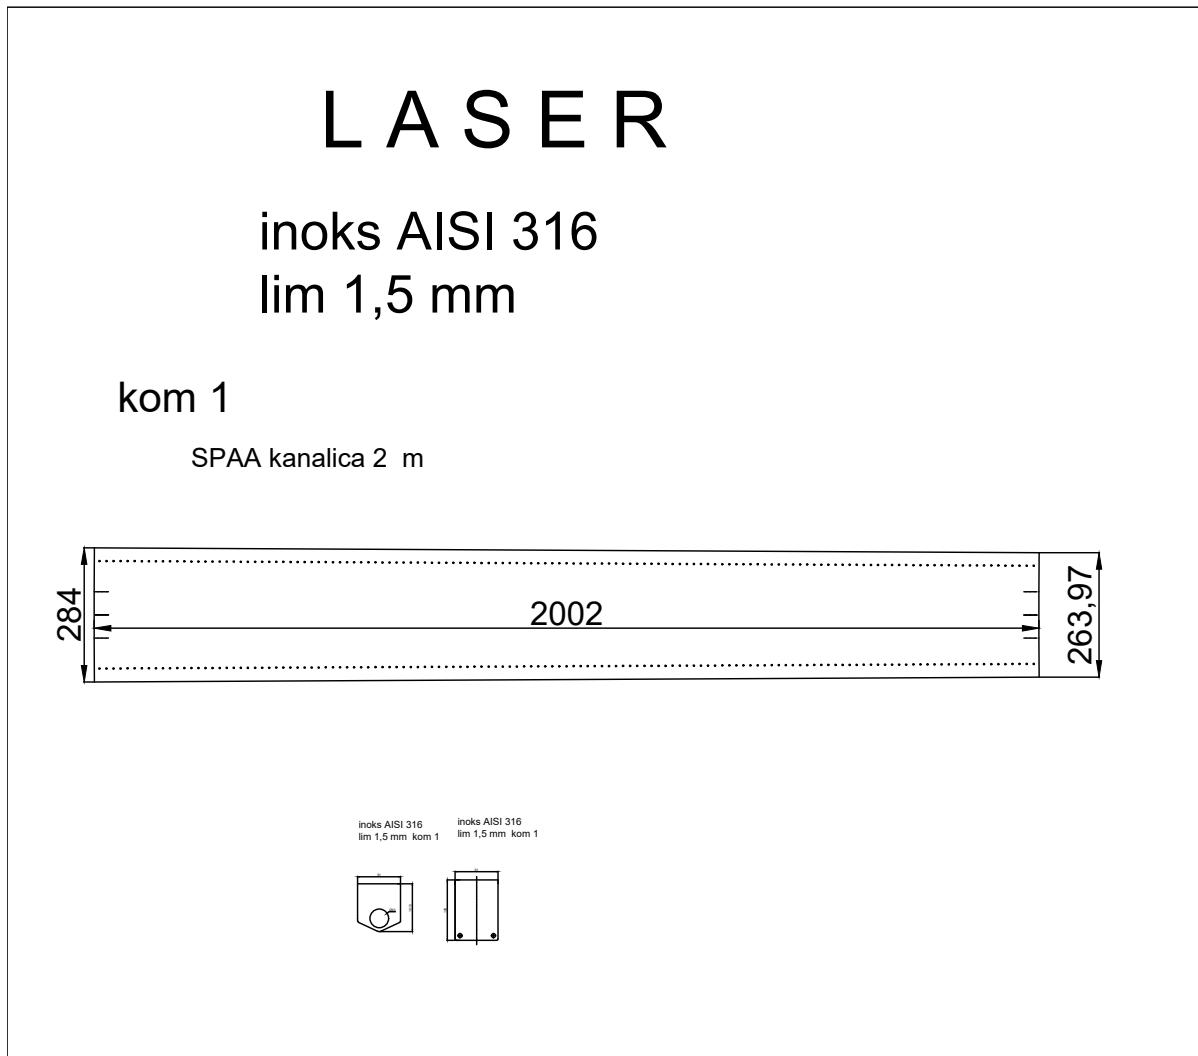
Laser drawing for SPA (Source: Own drawing)
